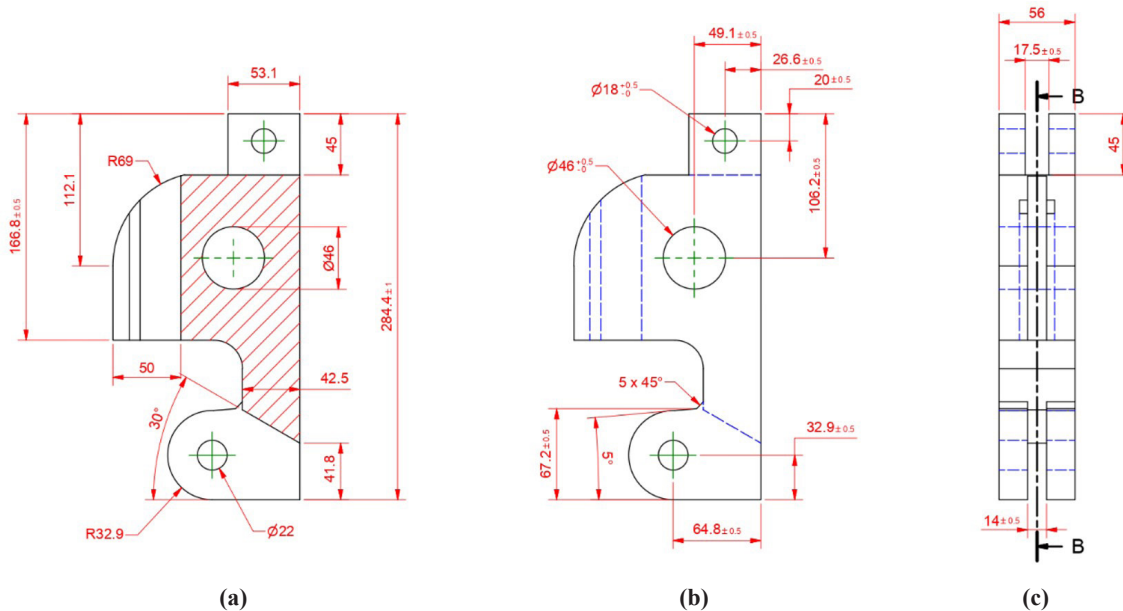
Details of fixed body (in millimeters): (a) side section of fixed body – section B-B; (b) side section of fixed body; (c) front view of fixed body.
